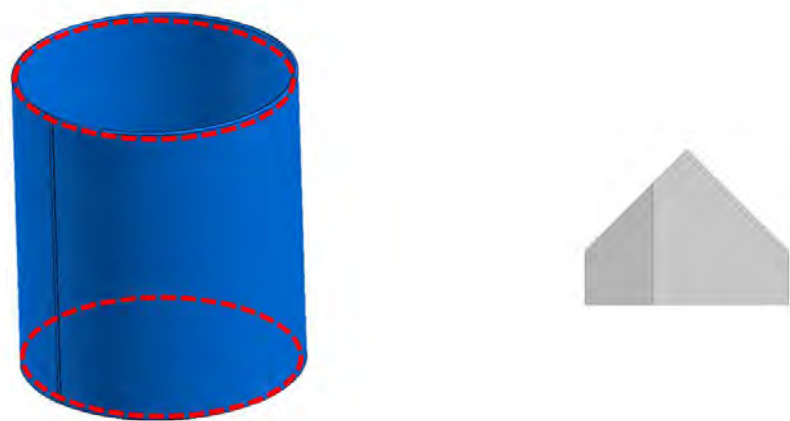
The welds for connecting the inner cylindrical shell to forged rings and the bevel shape on the side of the cylindrical shell component
